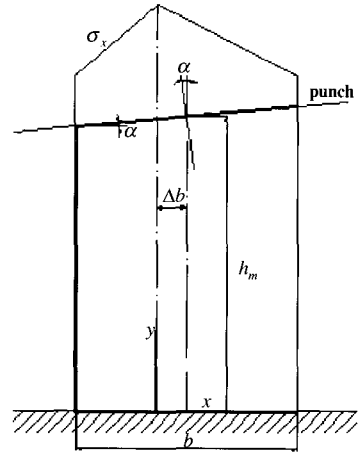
Disturbed lubrication, tool and billet misalignment in upset forging
